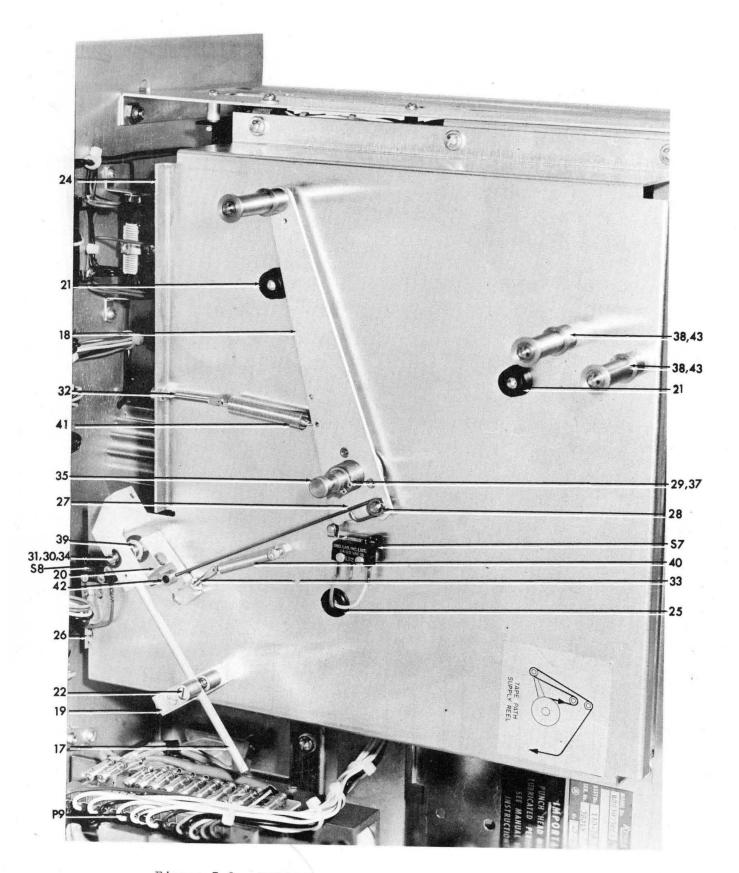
RDB3075BCX, Top View of Deck Assembly with Hub Assembly
